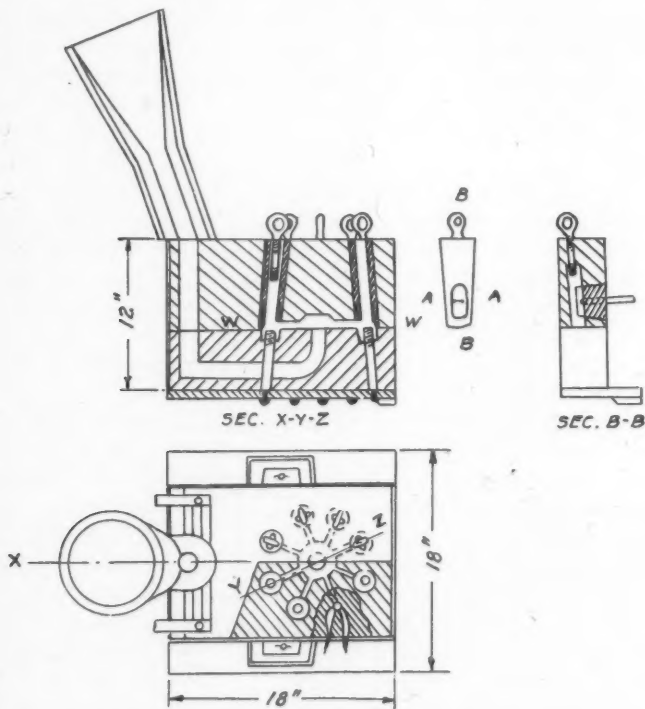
MOLD FOR 8 TEST PIECES CAST IN CORES.
